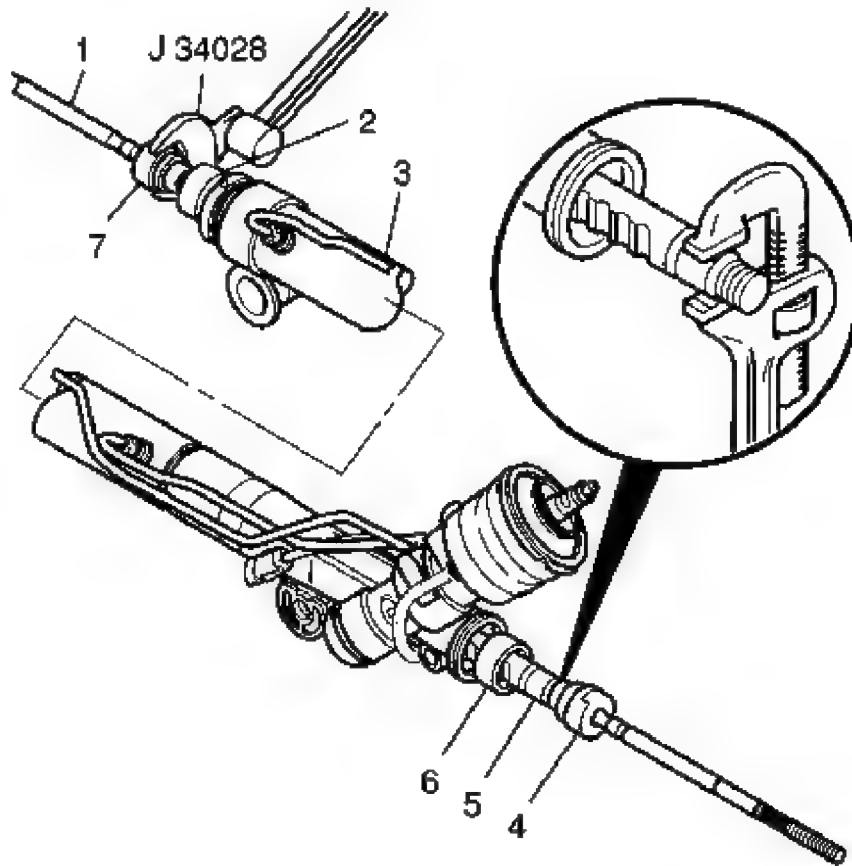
View of Shock Dampener, Female/Male Inner Tie Rod and Inner Tie Rod Housing with J 34028
